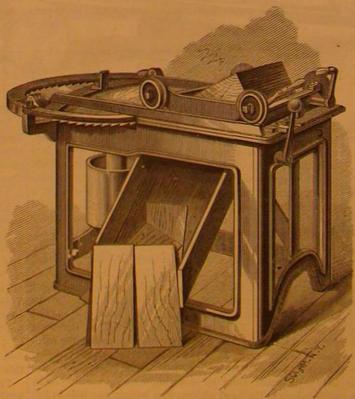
THE VICTOR SHINGLE-SAWING MACHINE.
